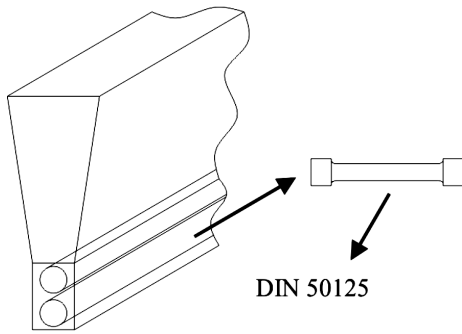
Monotonic test specimens manufactured from Y – cast ingot
